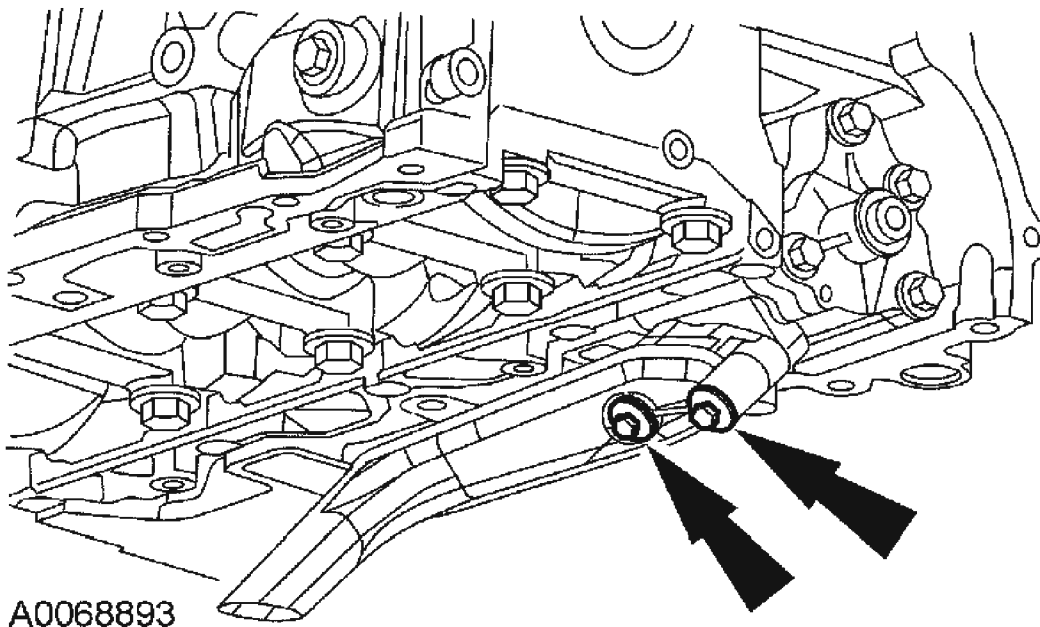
Removing Oil Pump Screen And Pickup Tube Bolts
